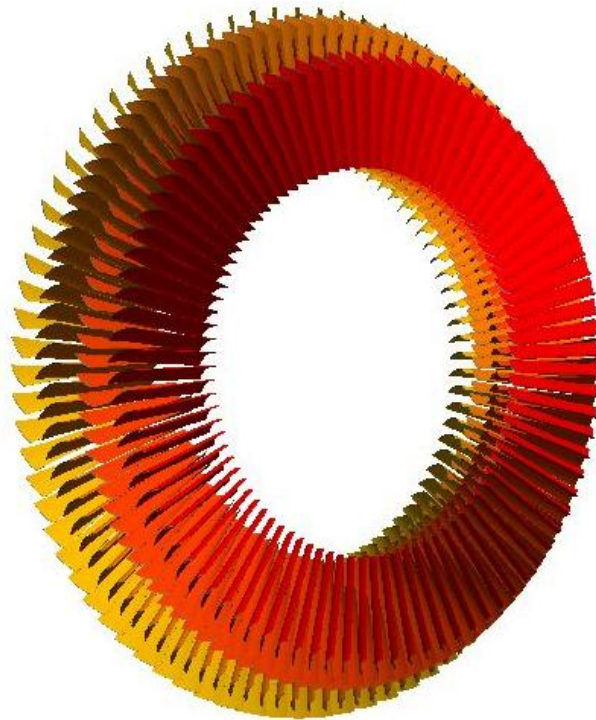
T-AXI three-spool LPT blading, inlet view
